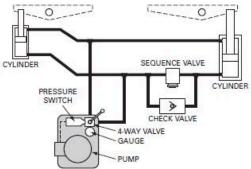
Hydraulic circuit showing control valves used for welding application. (Courtesy of Owatonna Tool Co., Owatonna, Minnesota.)
